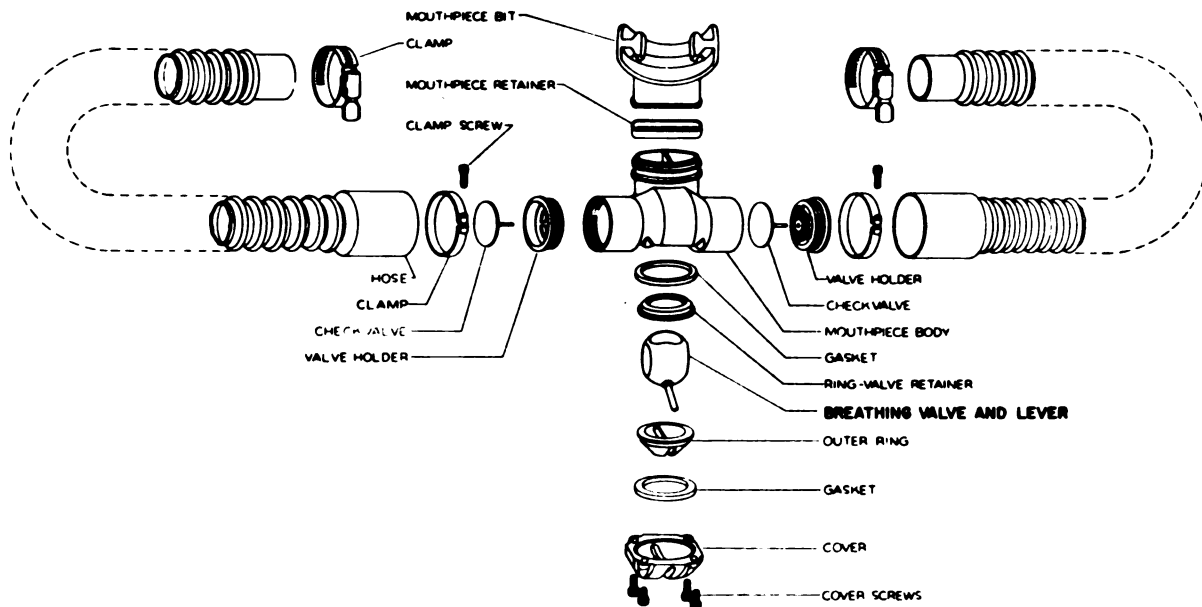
Mouthpiece and breathing valve (exploded view).
